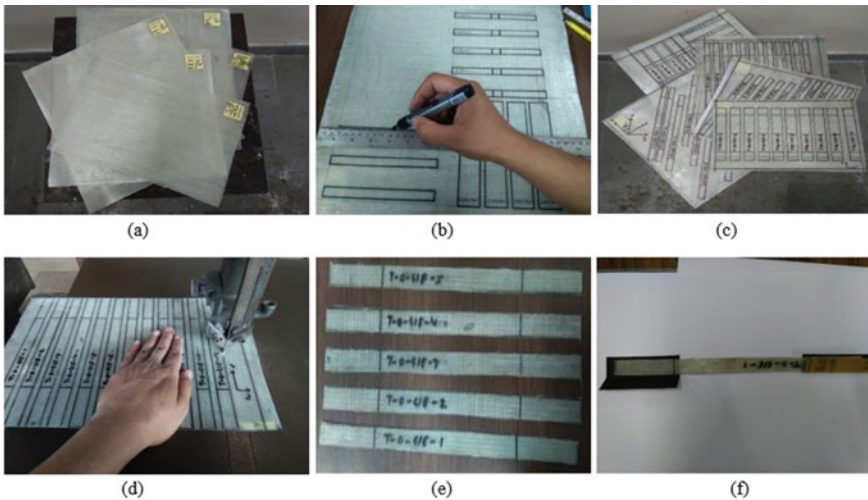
Preparation of GFRP test coupons: (a) cured GFRP laminates; (b) marking of coupons; (c) marked GFRP laminates; (d) machining of a GFRP laminate; (e) machined coupons; (f) strengthening, and enhancement of friction at grips using folded emery cloth strips
